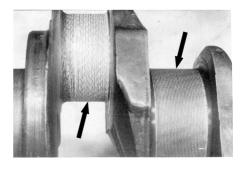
Crankshaft of forced diesel (55X2H2MΦA steel) with indigenous and connecting rod necks reinforced with center offset of the shaft by the method of electron beam melting in a vacuum
